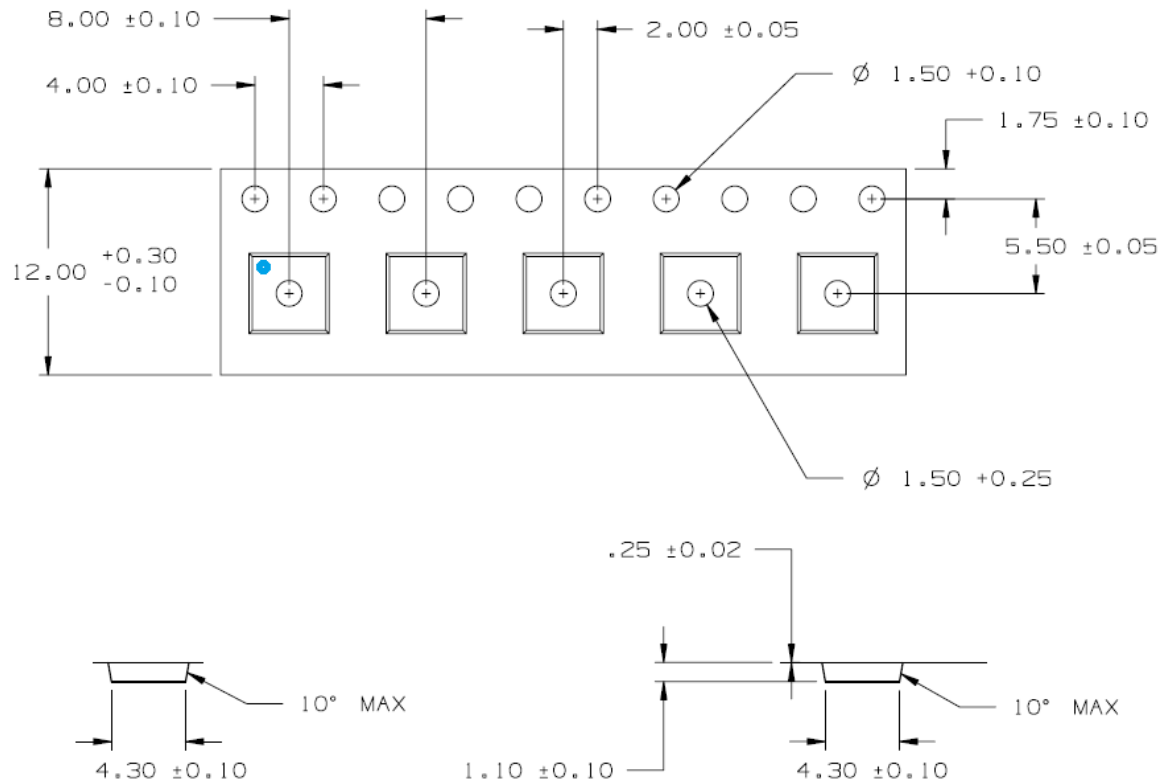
Tape & Reel diagram. Blue dot shows pin 1 orientation on QFN tape (All dimensions are in millimetres)
